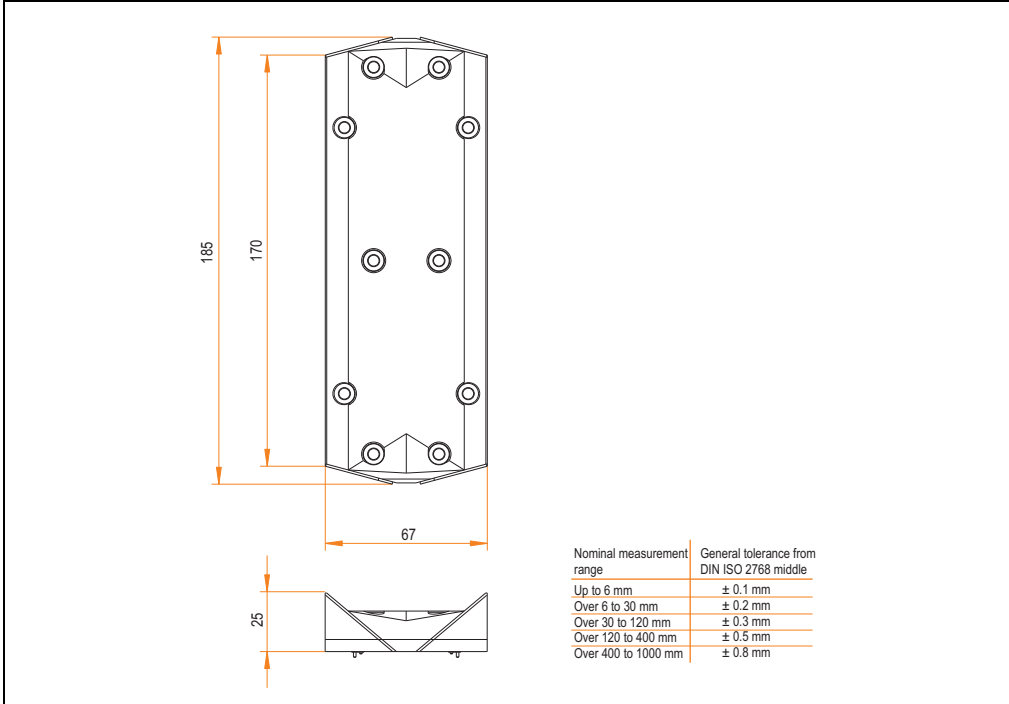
Dimensions - extension connector 5AC800.CON1-00
